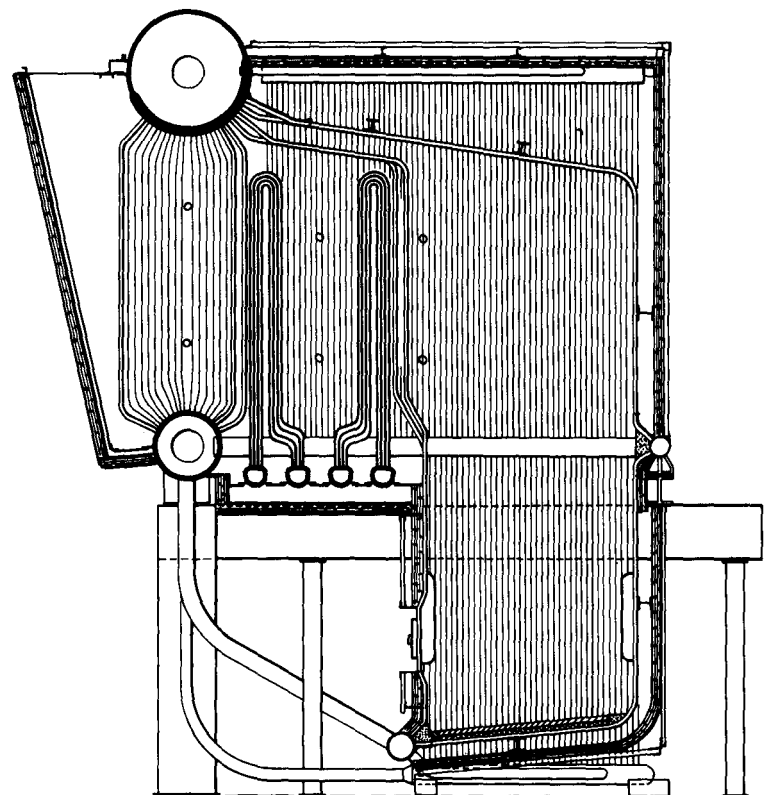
CE V2M-9 boiler. Reprinted with the permission of Combustion Engineering, Inc.
